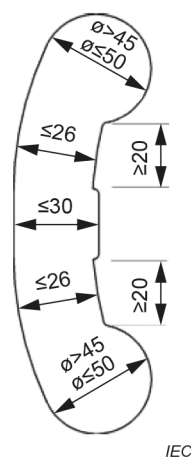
Example 4 – Opening sizes > 45 mm and ≤ 50 mm
